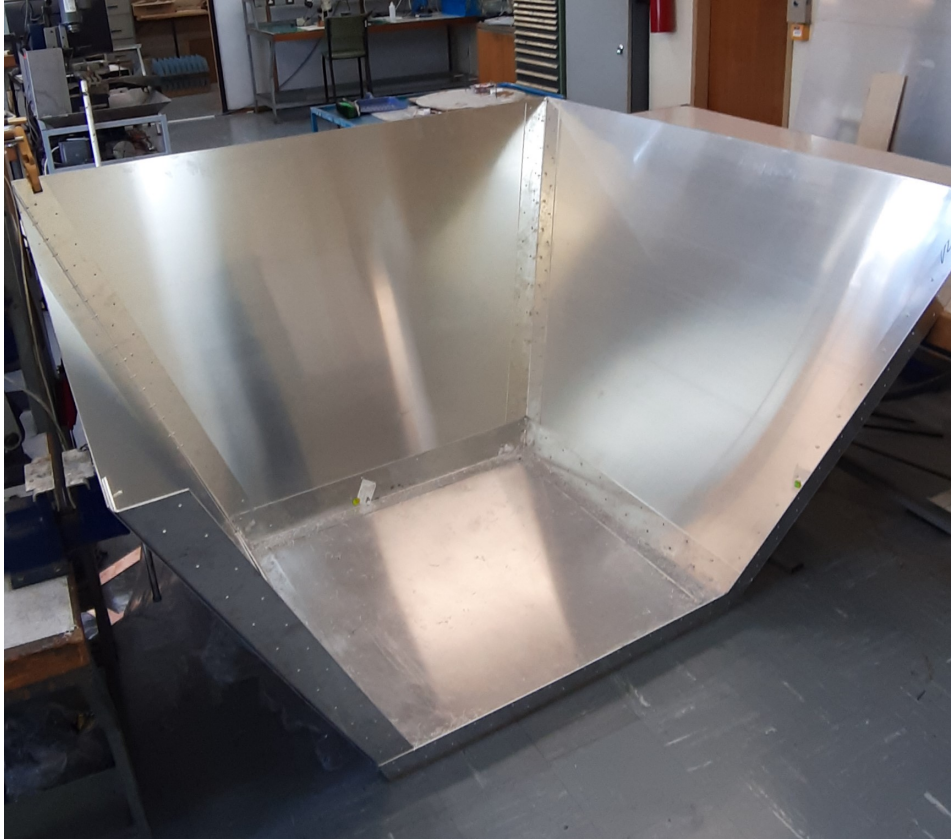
The assembly of SU-THACO inside the engineering workshop at Stellenbosch University.
